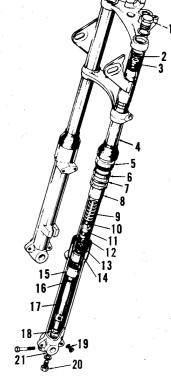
Exploded view of front suspension used on later model Commandos.
